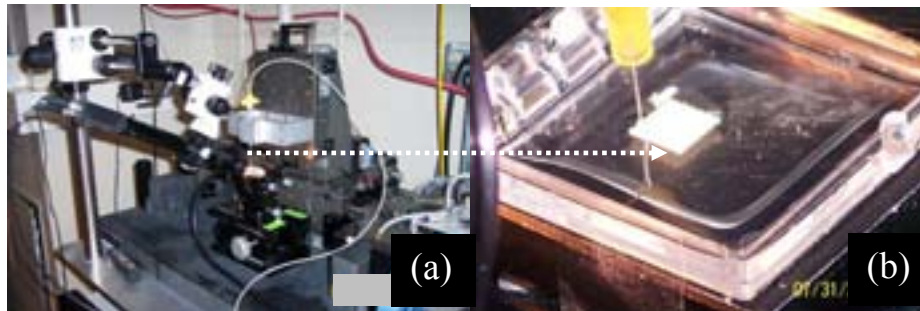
a) Pictures of the robocasting assembly -deposition module with camera, b) Picture showing the printing process using $100 \mu\text{m}$ tip, Feature size 5mm .
